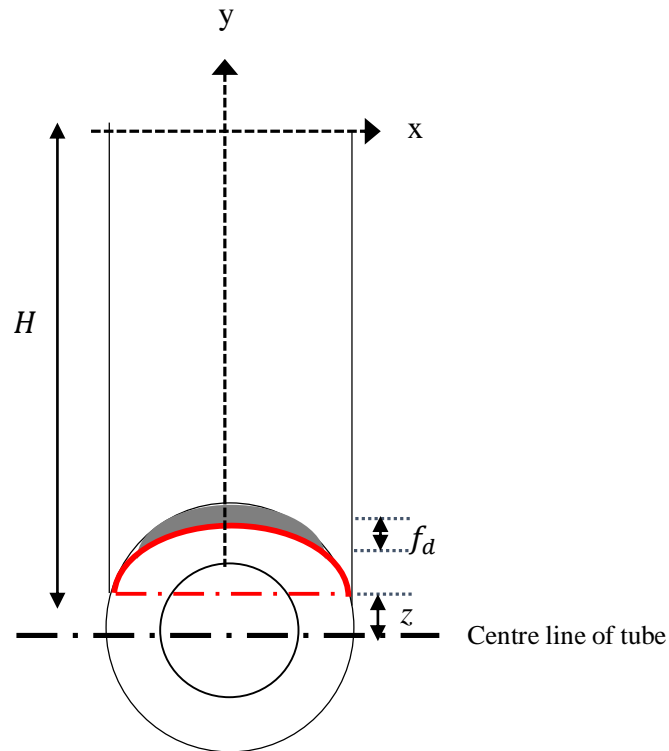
Schematic showing the modelling of an n-shaped flawed tube - cross-section.
